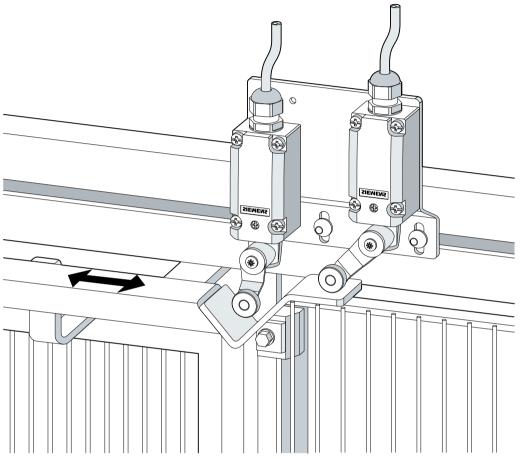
Example: Two 3SE5 position switches with twist levers on Brühl hinged doors with mounting accessories
